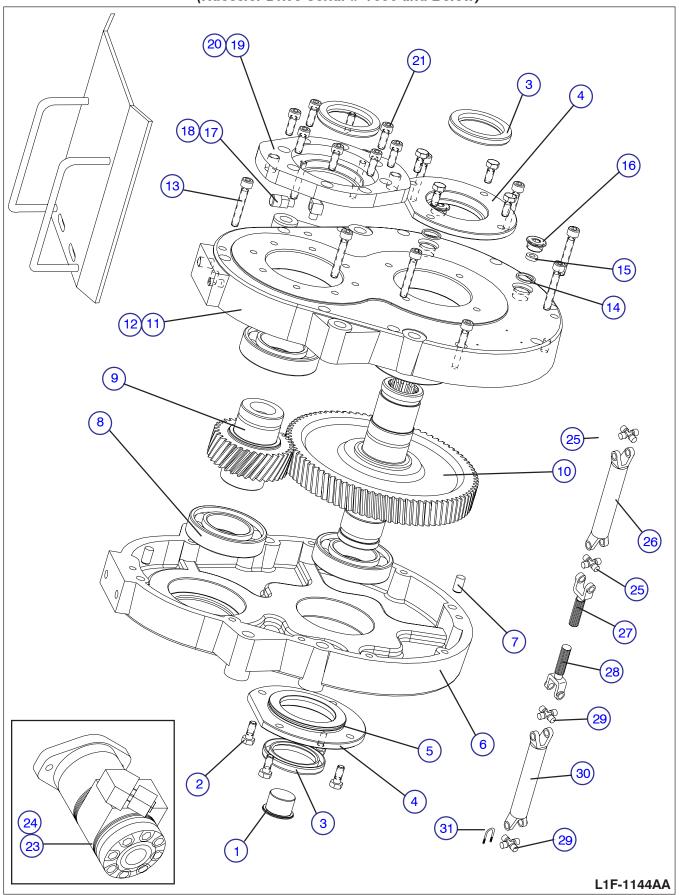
B. CENTER DRIVE AND DRIVE SHAFTS (Haessler Drive Serial # 1690 and Below)
